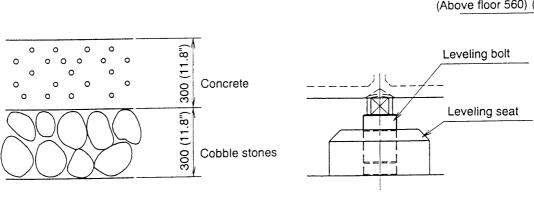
Foundation layout diagram for the machine with APC (VS40)
